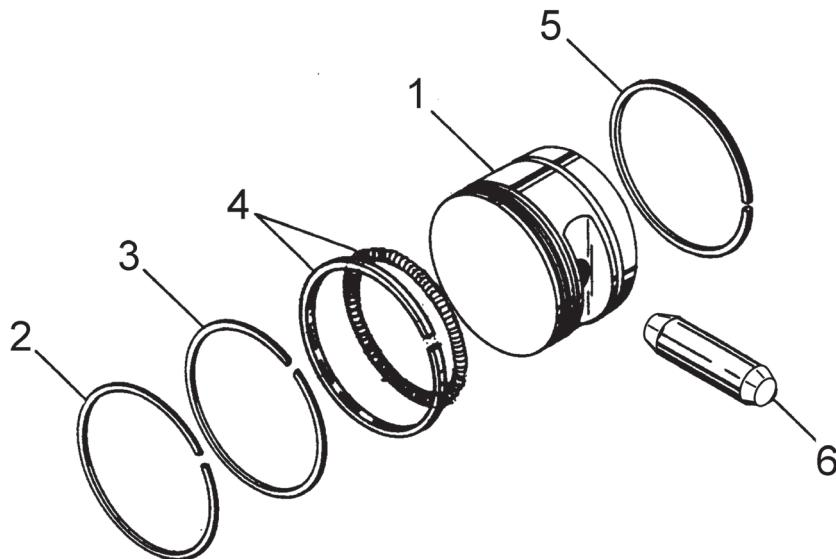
Pistons, Piston Rings and Piston Pin Assembly
